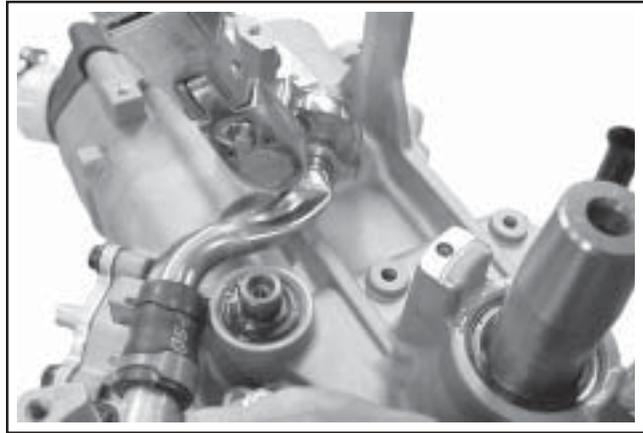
Torquing the Hex Cap on Fitting After Pump Installation.
